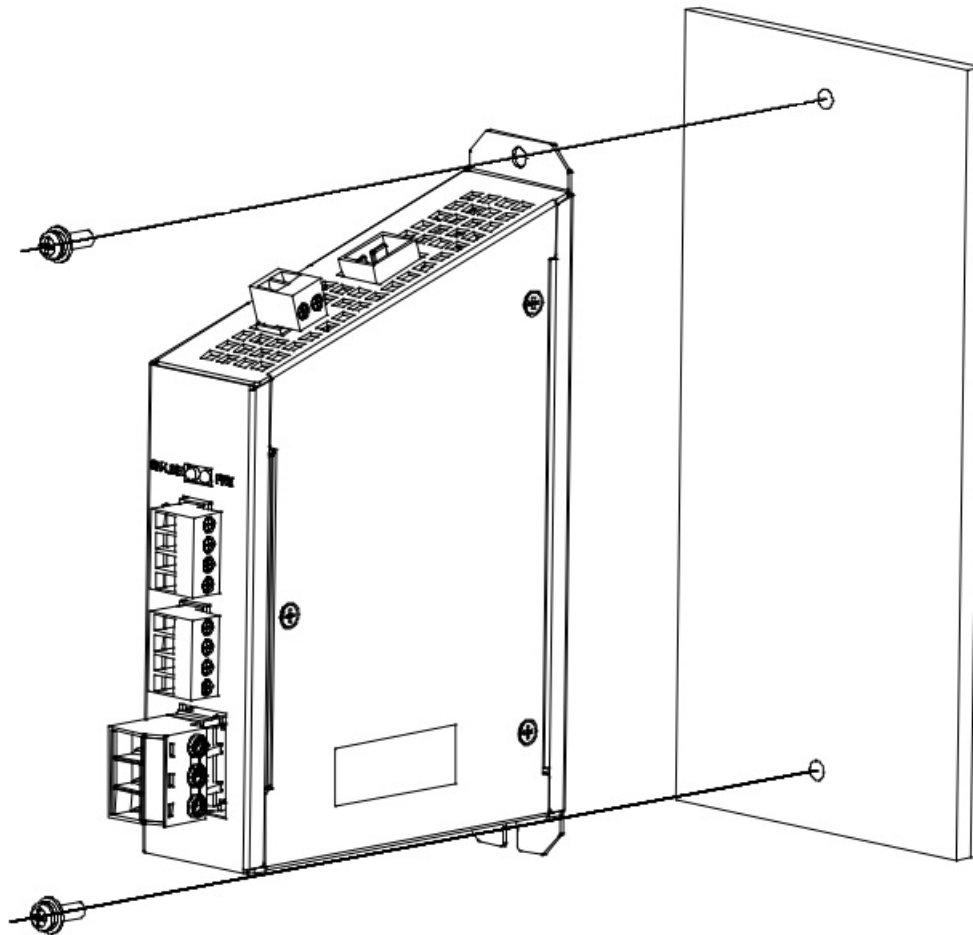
Product outline and mounting dimensions diagram (unit: mm)
